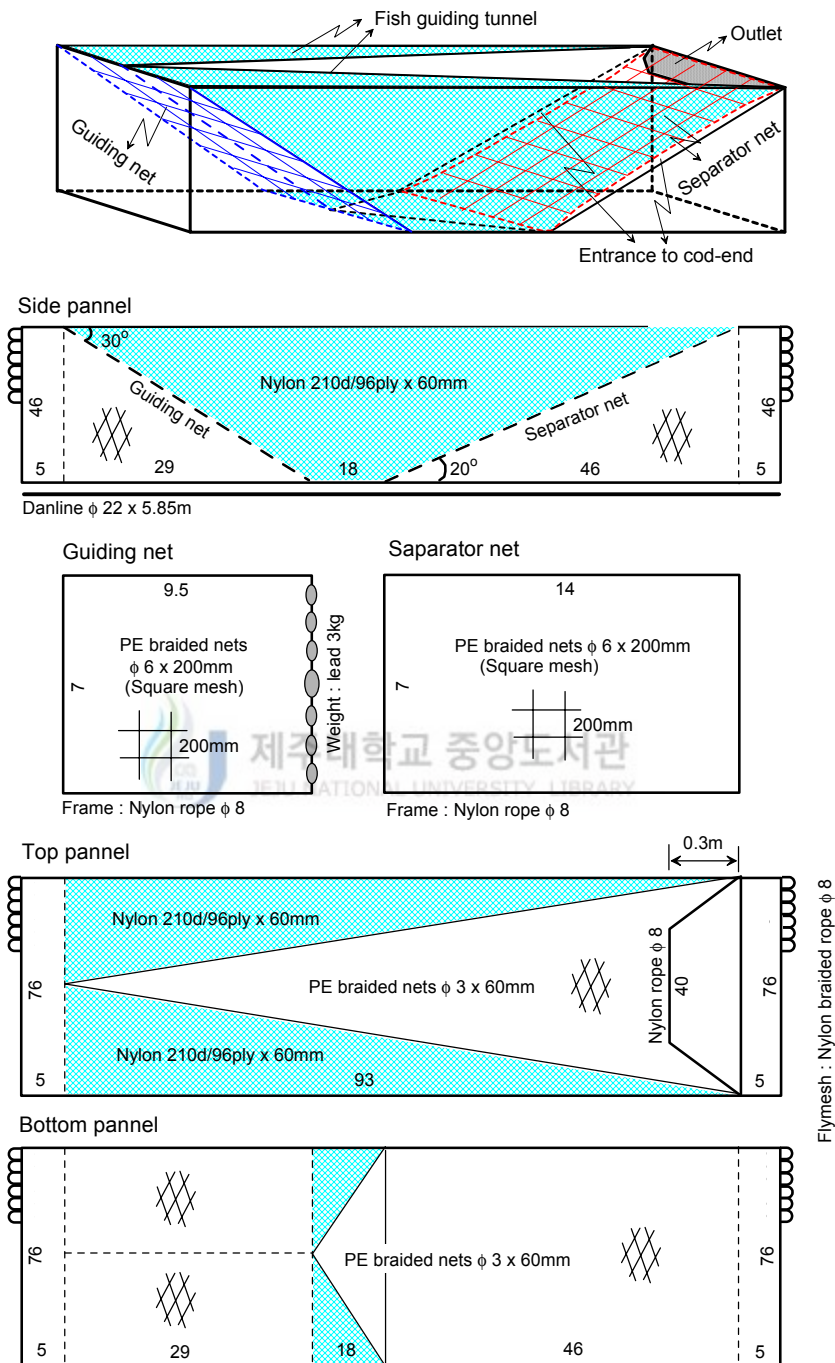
Schematic shape and technical drawing of the GST type jellyfish separator system.
